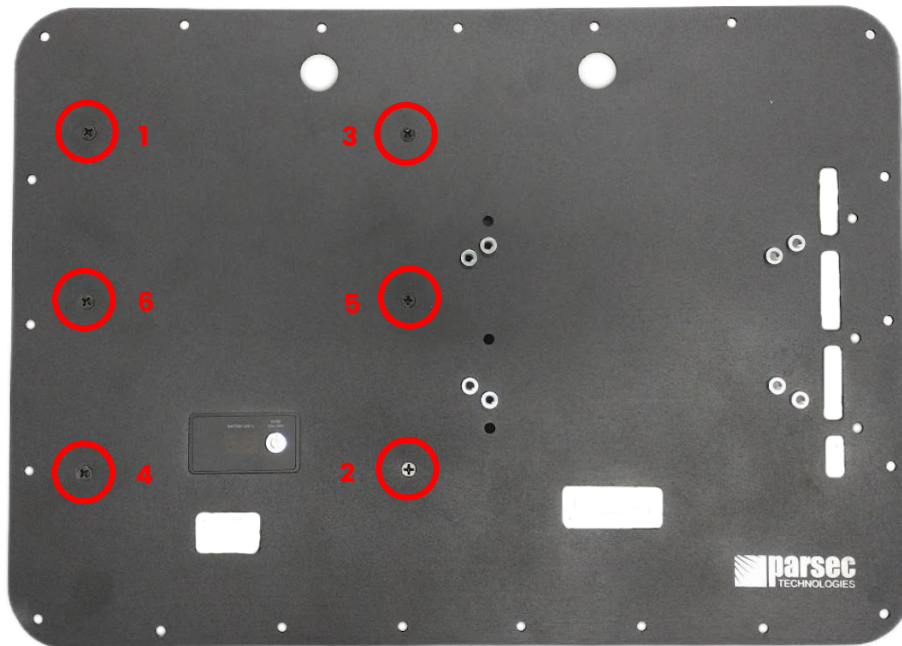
Fasten the battery tray with battery pack to the cover plate using PTA0368-B screws. (Bernese Mountain Dog G)
